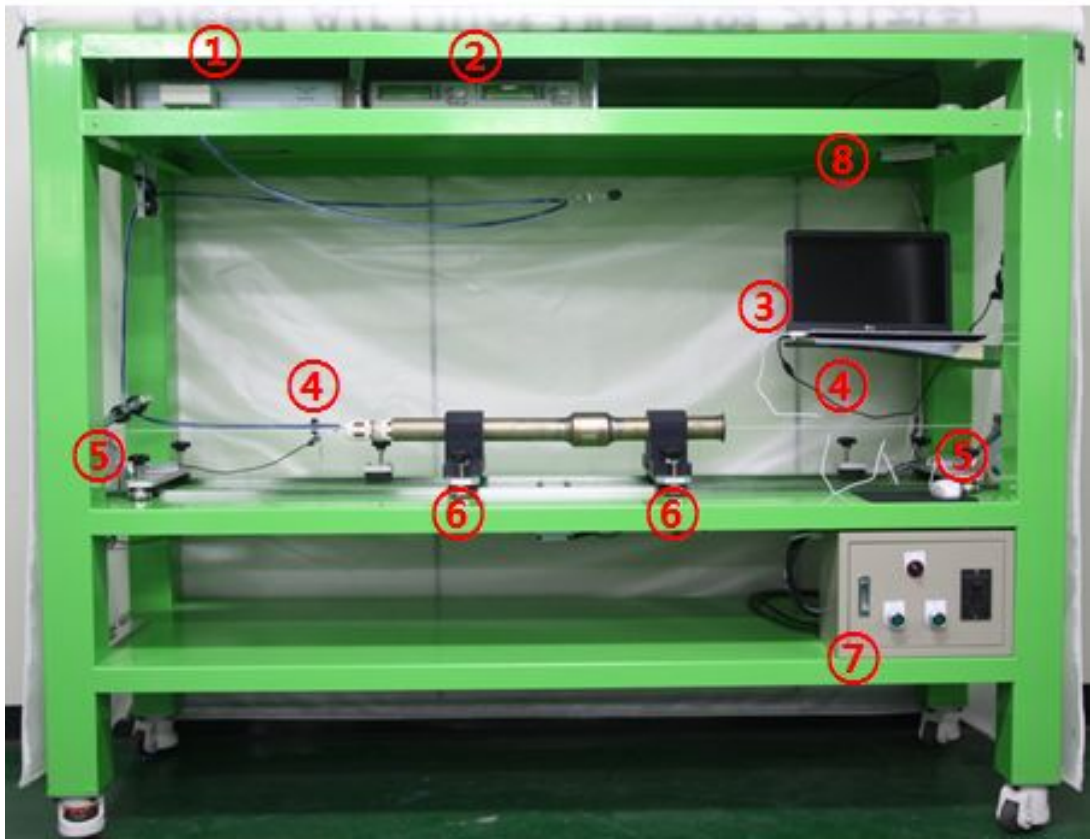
Full inspection system of bleed air ducts
